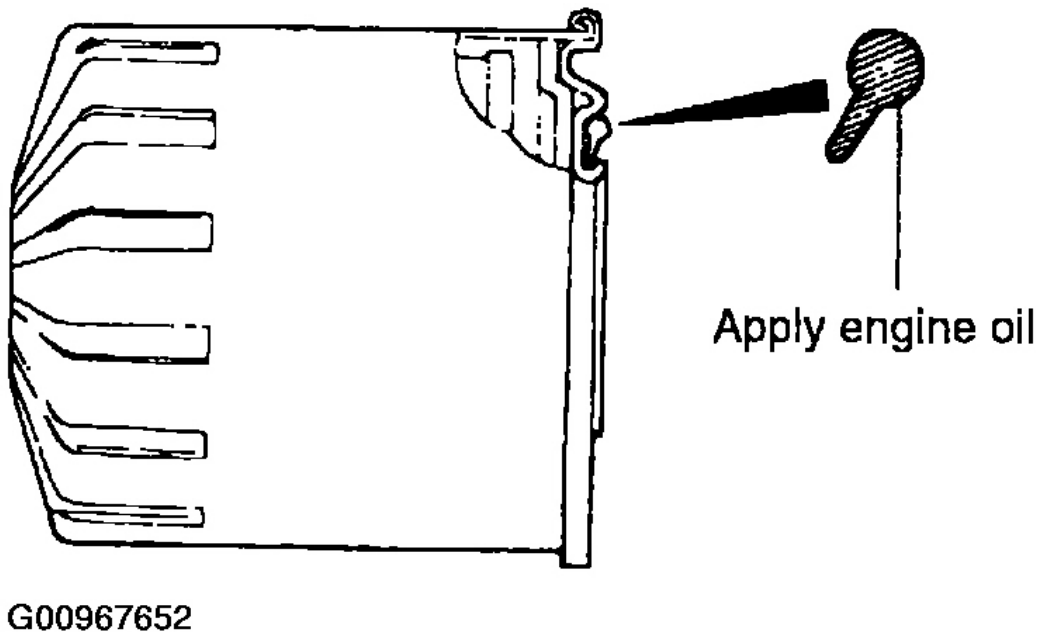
Applying Engine Oil To Oil Filter Rubber Gasket
